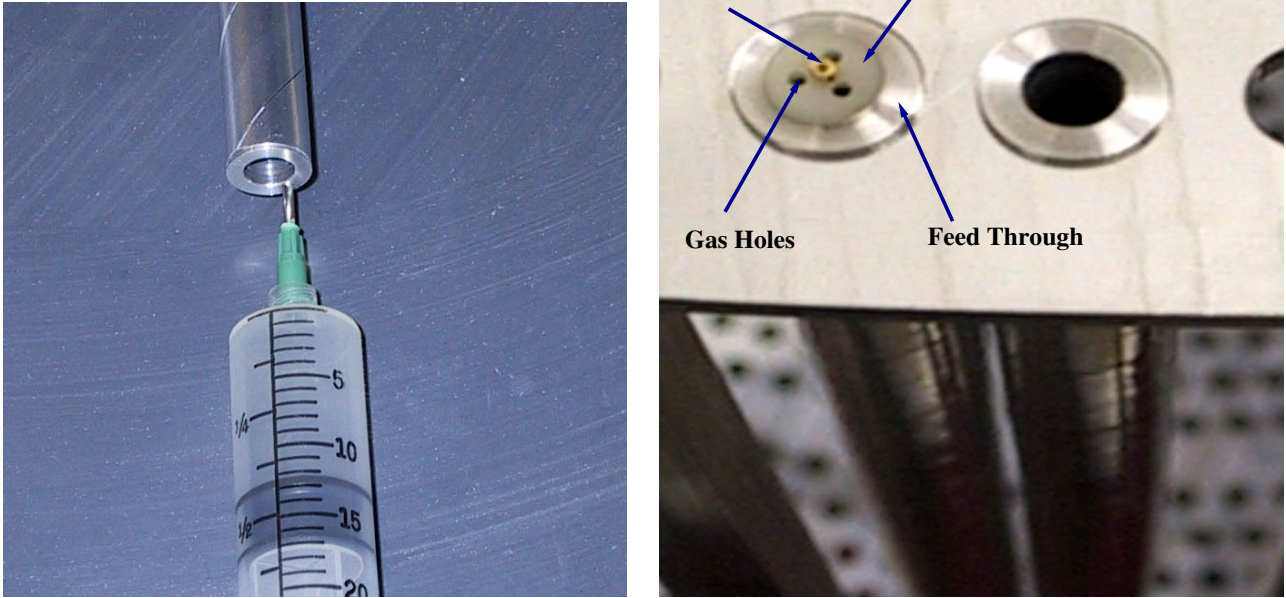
(left) Shows a donut being glued into a straw tube. (right) Shows the feed throughs holding a straw tube in place at the end of the chamber. Note the crimp pin in the center of the pin holder and the three holes to allow gas to flow into the straw tube.
